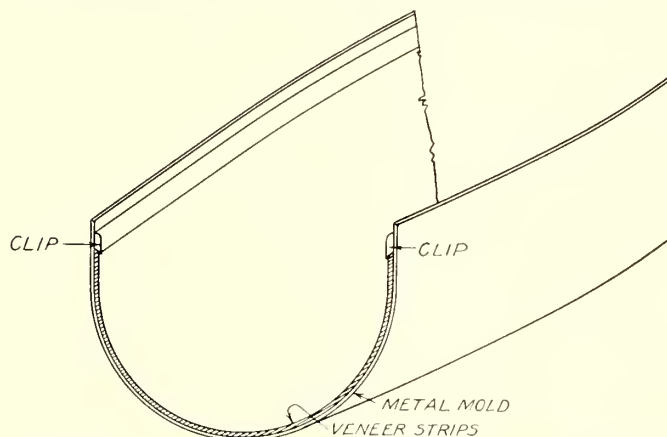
Section through female metal mold illustrating clips for holding veneer strips in place.
